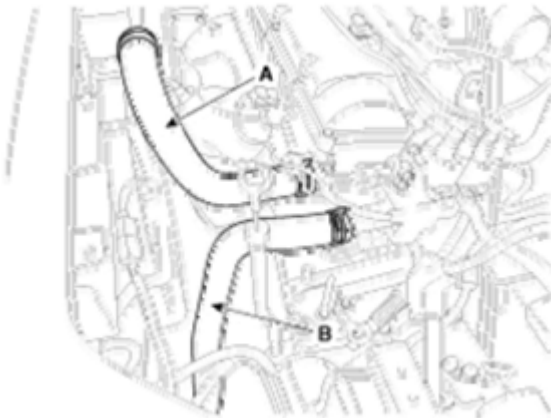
Identifying Upper Radiator Hose & Lower Radiator Hose
